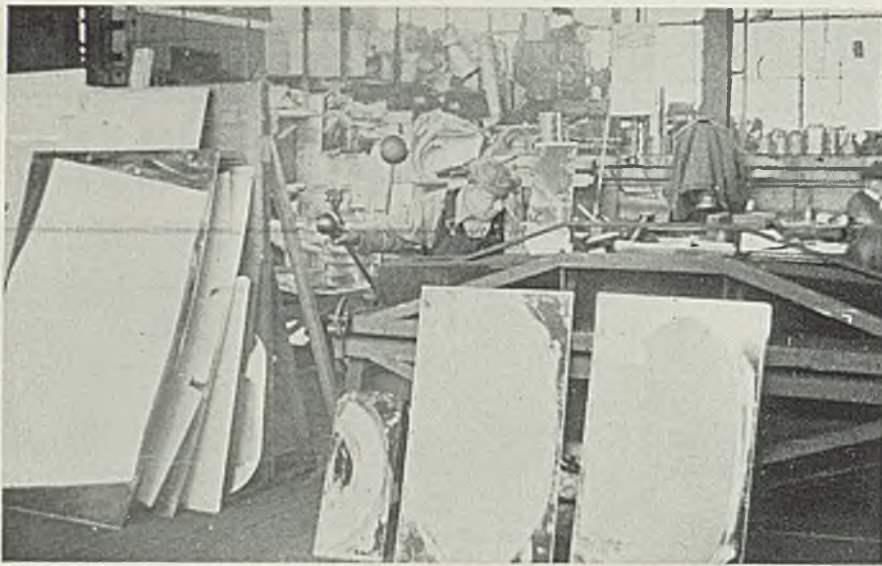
Bending brake used to form many parts. Also seen stacked around are stainless sheets with the protective covering pasted in place, ready for cutting to shape and forming
